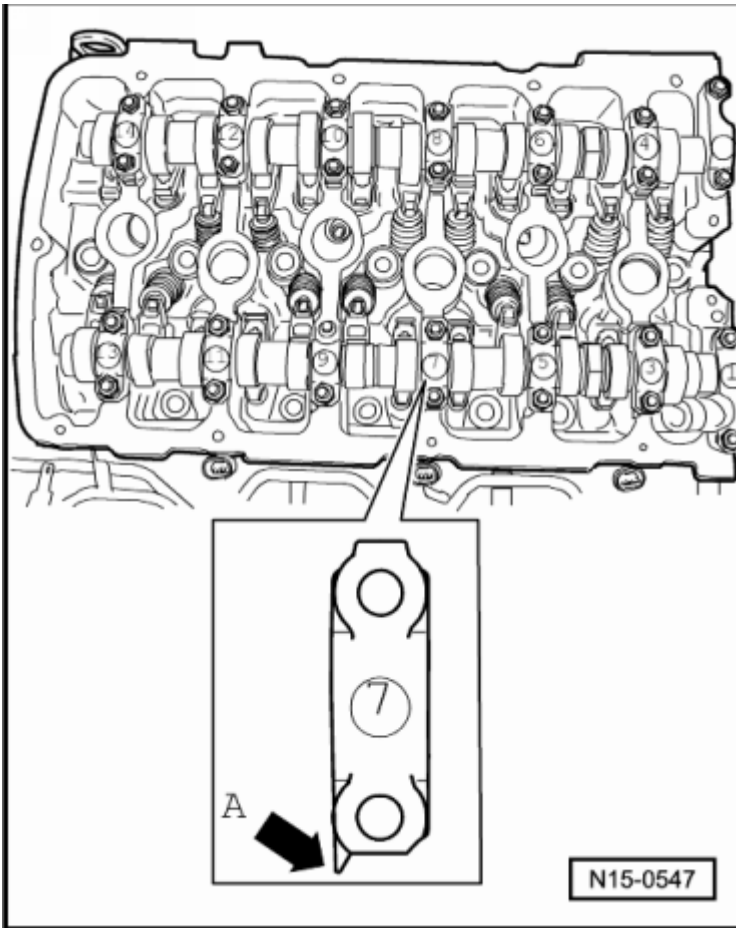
Identifying Points Of Intake And Exhaust Camshaft Bearing Cap Face Outwards
